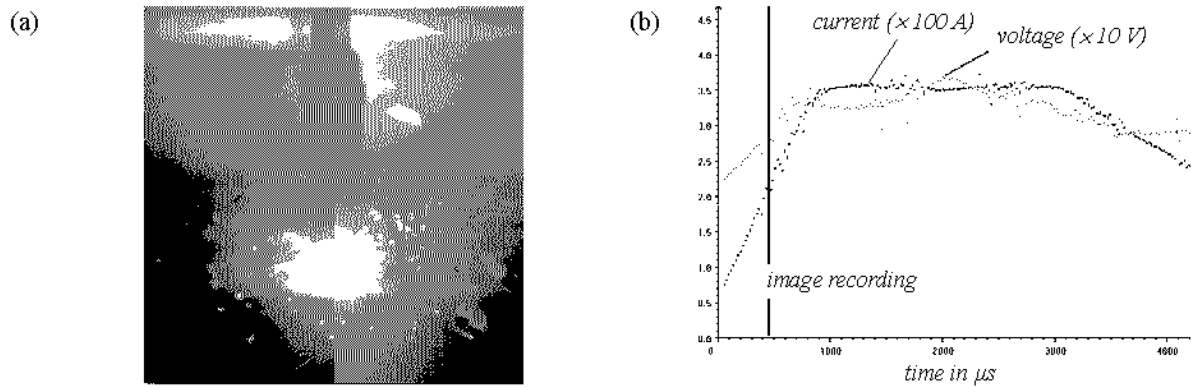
(a) Image of the welding process; (b) synchronized and simultaneously measured electrical welding parameters current and voltage including the time of the image recording [4]
